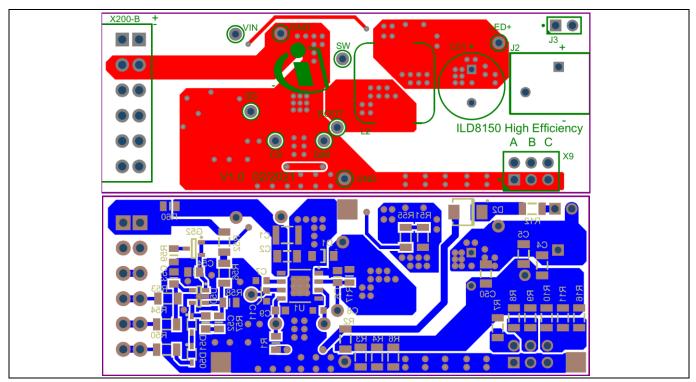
ILD8150E high-efficiency design PCB layout – top and bottom
